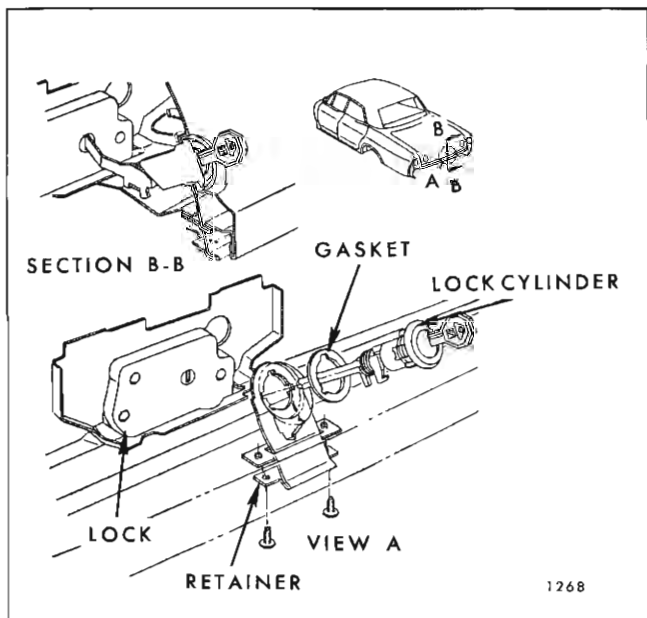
F8—Rear Compartment Lid Lock Cylinder
